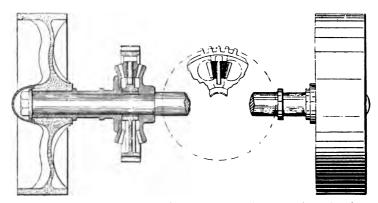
Londonderry heavy-freight steam vehicles. View showing driving wheel and differential gear on main axle.
